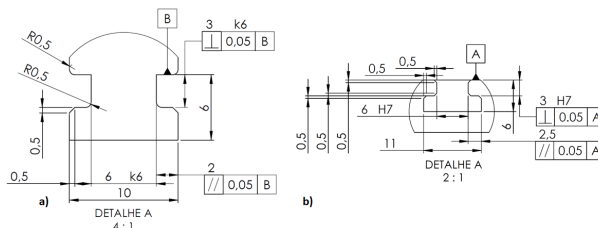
Dimensions and geometric tolerance of the a) simple eyelet b) rear plate
